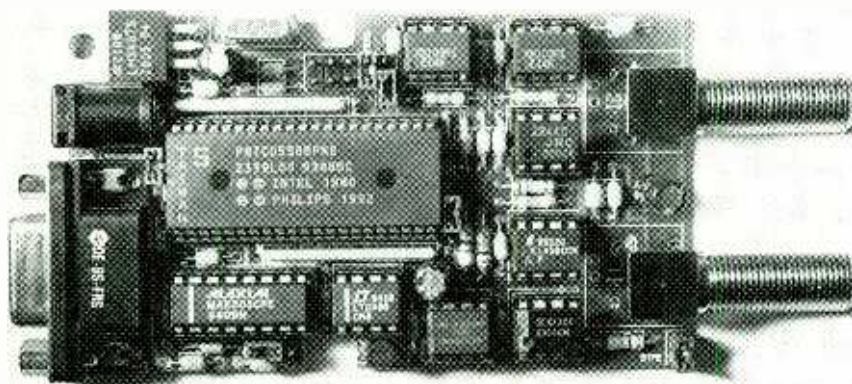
THE COMPLETED BOARD. The leads should be trimmed to the length of the IC socket pins to allow the board to sit flat at the proper height in the enclosure.
